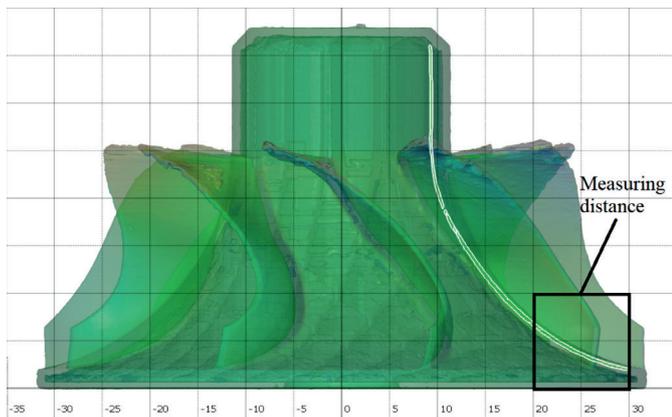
Profile of the cross-section of the rotor core with the marked measurement section
